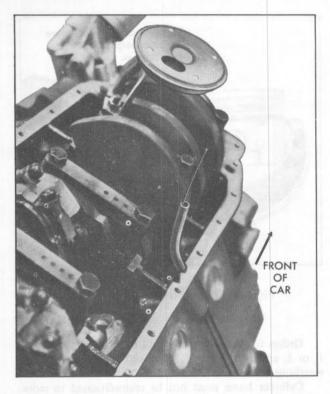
Dipstick Tube Position—Except Eldorado
